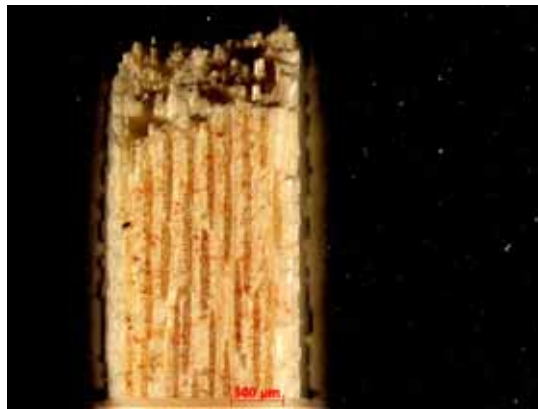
Fracture surface of the N610/Al₂O₃ specimen with 8ply HSW subjected tension to failure in laboratory air at 1100 °C.
